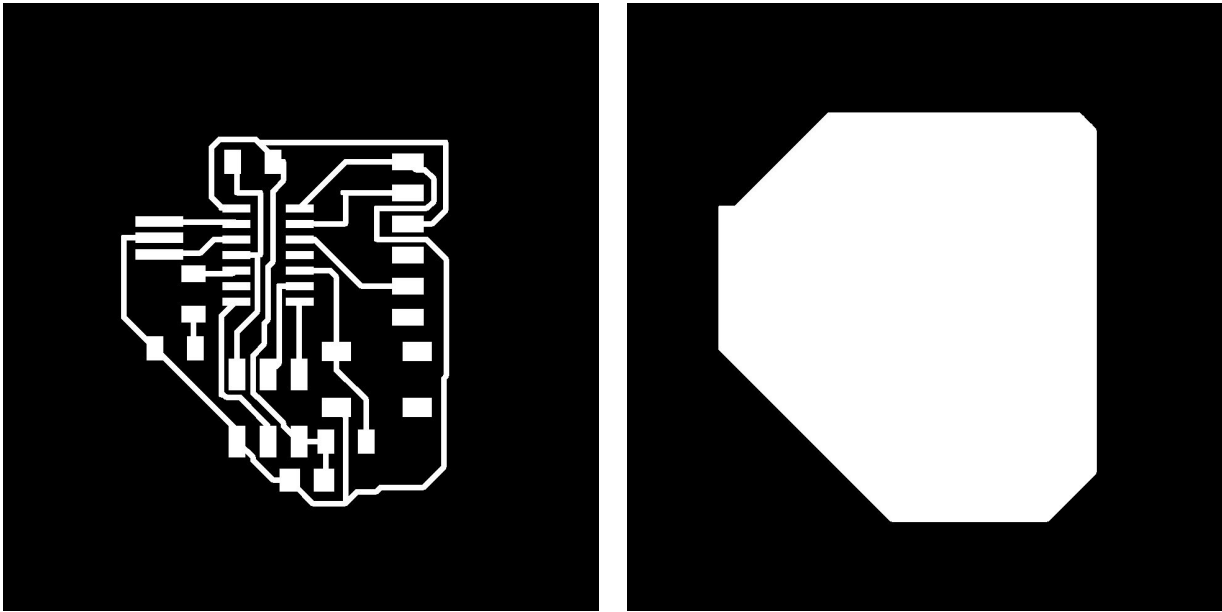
PNG image used for milling machine trace (left) and outline (right) toolpaths
